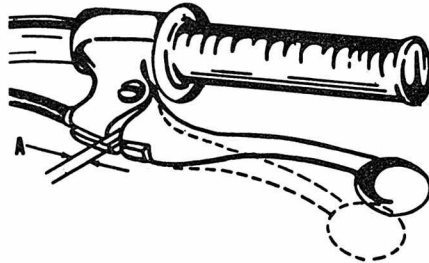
Adjust clutch cable to obtain 1/8 inch free play at pivot (A).
